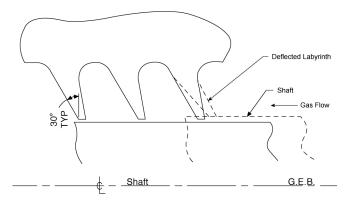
Rub Tolerant Polymer Labyrinth Seal. Maintains Original Shape and Clearance after Shaft Rub.
